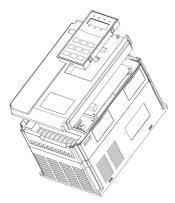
Disassembly drawing of lower cover plate of plastic shell
